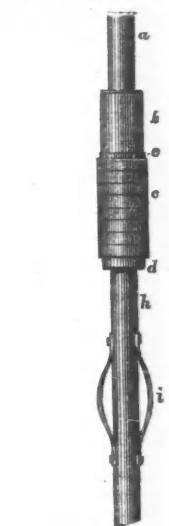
Rubber packing shown screwed together as it is in the well.
